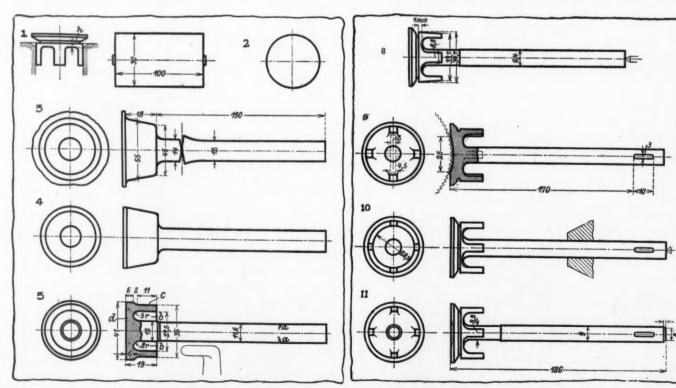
and 7—An interesting stage is manufacture of Adler valve
